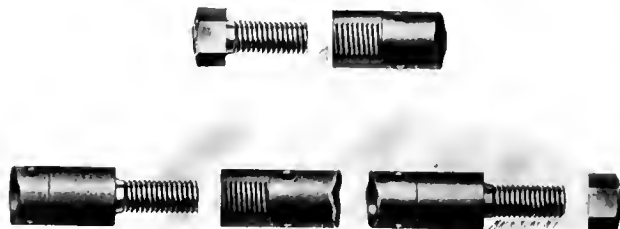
Design of Tie-bolts used for Holding Rack together and Supporting Shelves.
